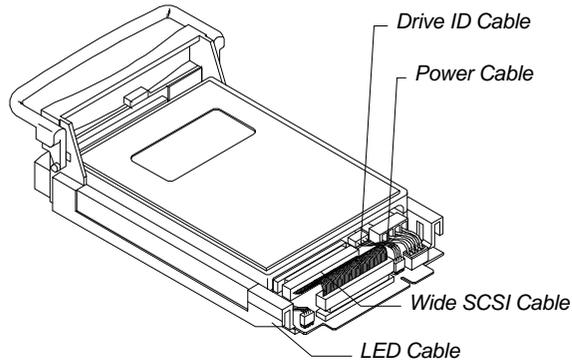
Connecting the Drive Cables (Wide SCSI Drive)
